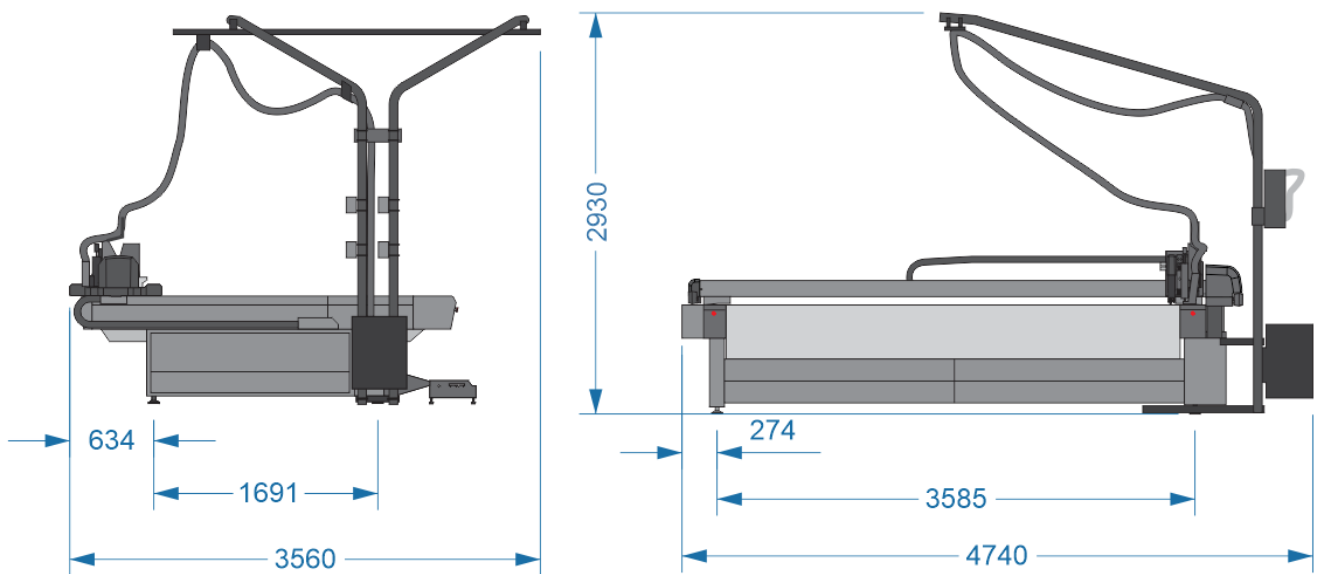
Floorplan F3220 with routing system – Right Side View and Front View
